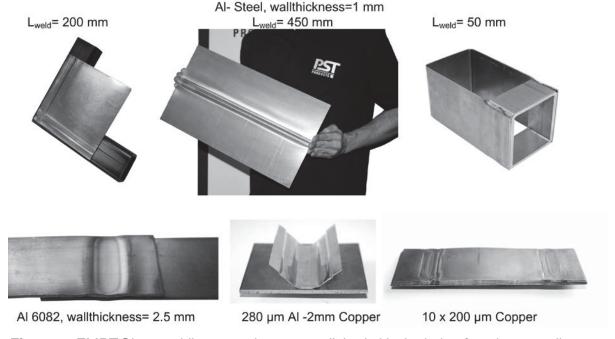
EMPT Sheet welding samples accomplished with the help of stationary coils
